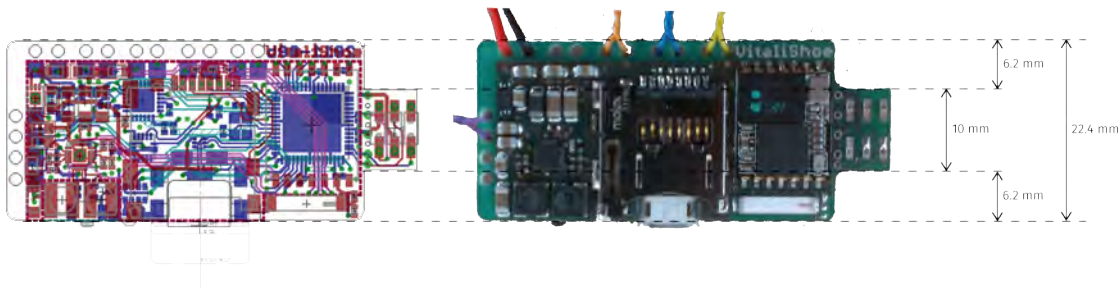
PCB schematic *in a ratio of 1:1* with the corresponding dimensions in millimeters.
